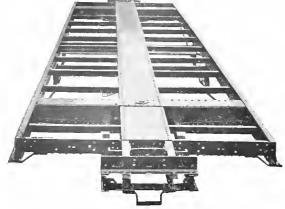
Structural Steel Underframe for Passenger Cars. Harlan & Hollingsworth.
